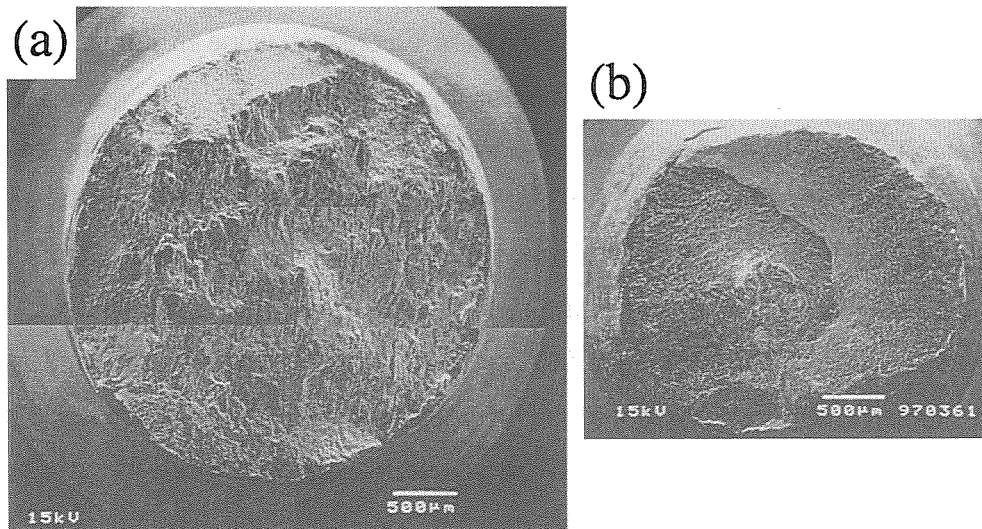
Fracture surfaces of SSRT specimens of cold-worked alloys (a) HP and (b) HP+C irradiated at 513 K
